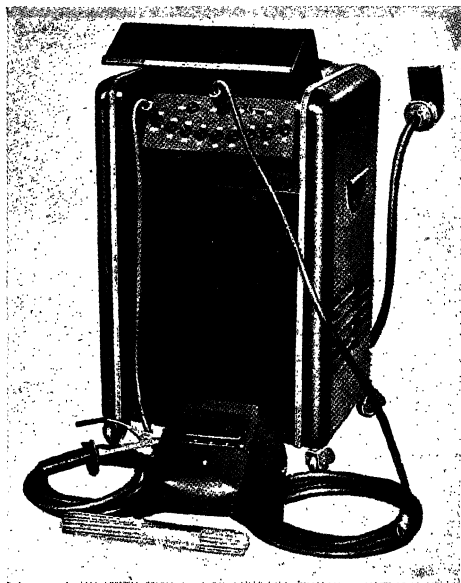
200-amp. a.c. arc welder. (*Al Rhodes photograph.*)
